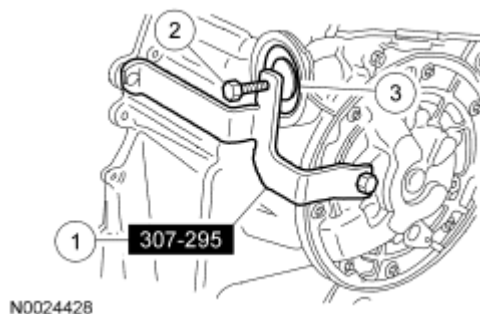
Removing Servo Retaining Ring Using Special Tools
